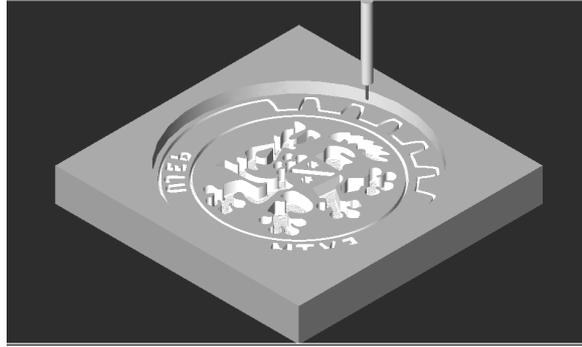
Simulation of the final machining of the mould in SURFCAM
